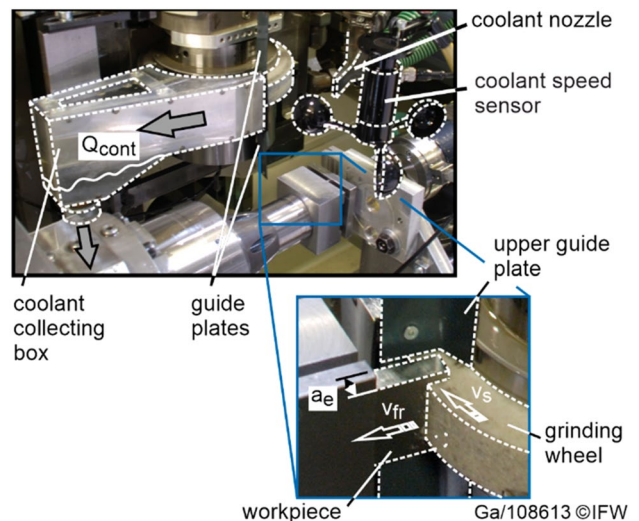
Experimental setup for collection of coolant within the KAPP KX1 machine tool
